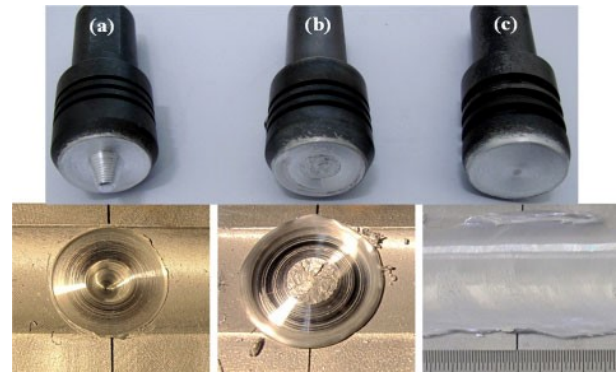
joint and corresponding tool: a keyhole created in friction stir welding process; b after FFSW; c after friction stir processing [39].
